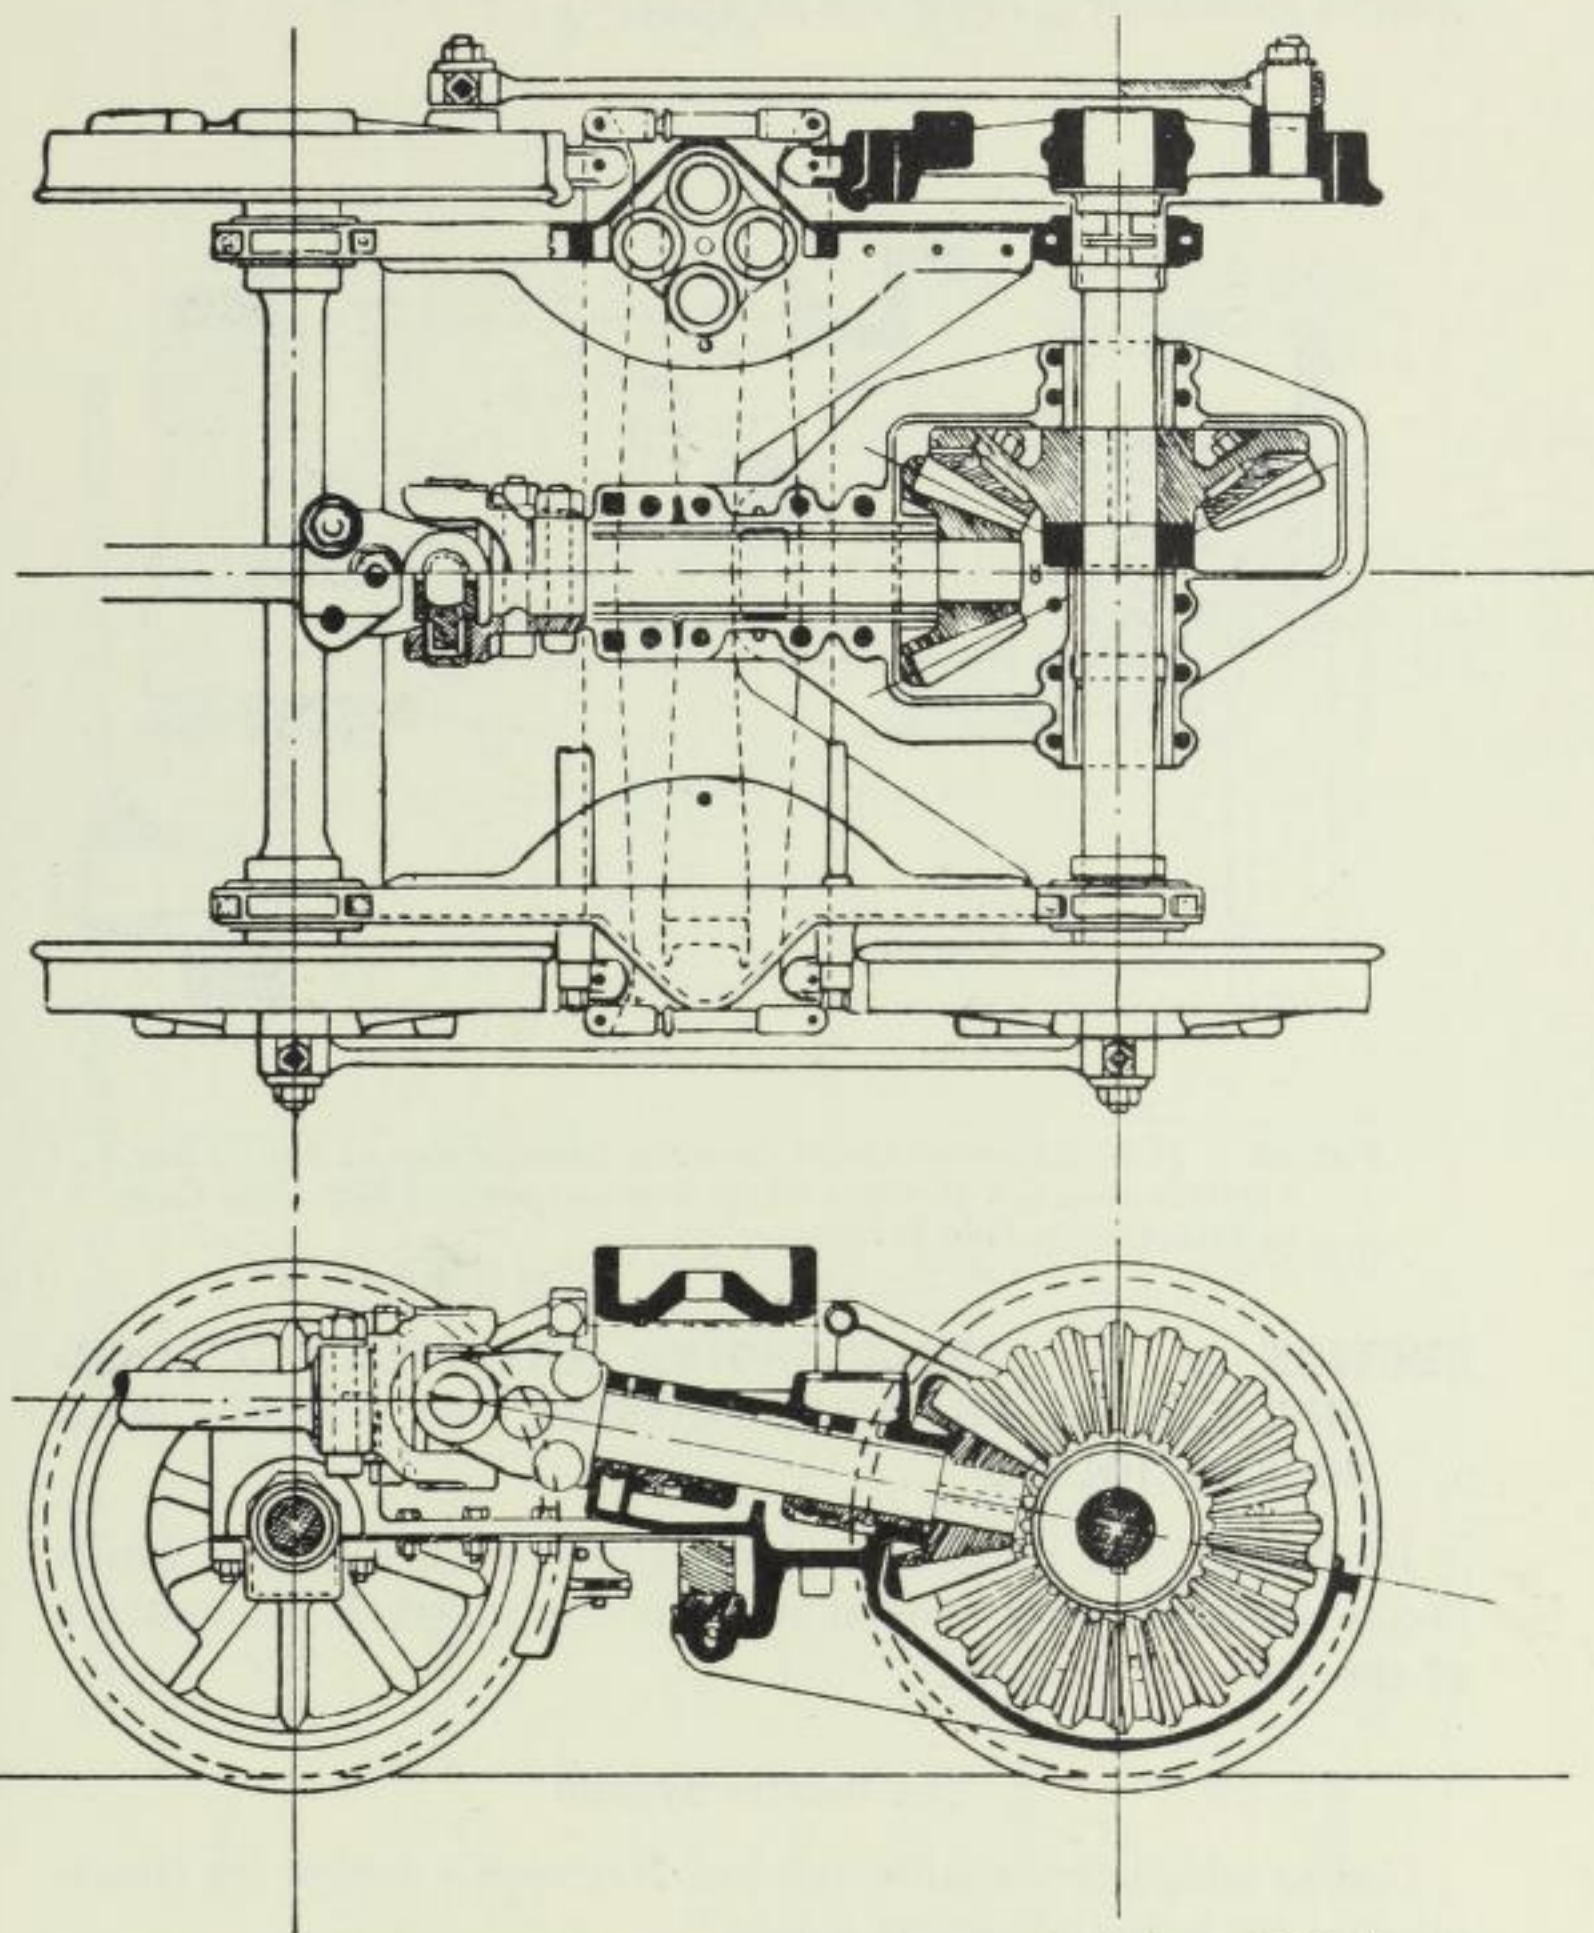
Truck with Spring Bar, Gear Cover and Pinion and Shaft Caps removed Heisler Locomotive.
